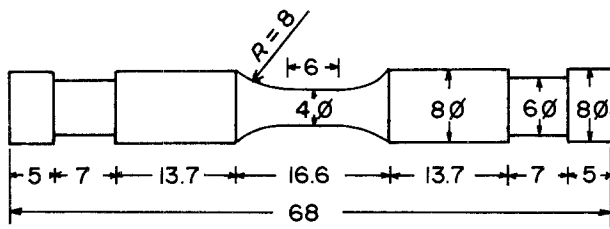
Drawing of the specimen used for fatigue tests (unit : mm).
